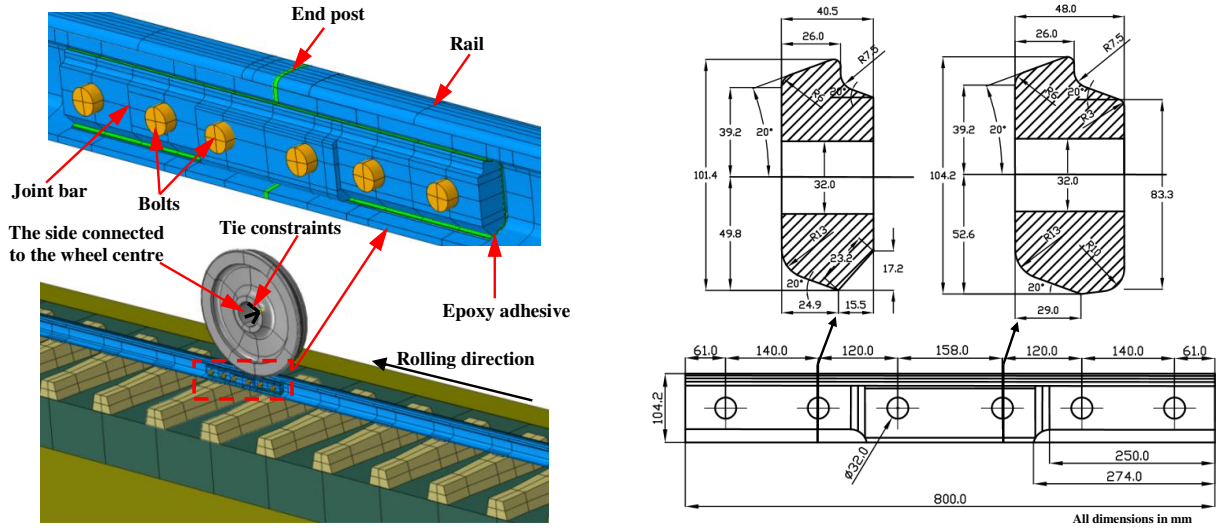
Left: global overview of a part of the wheel-track model with IRJ. Right: mechanical drawing of the joint bar.
